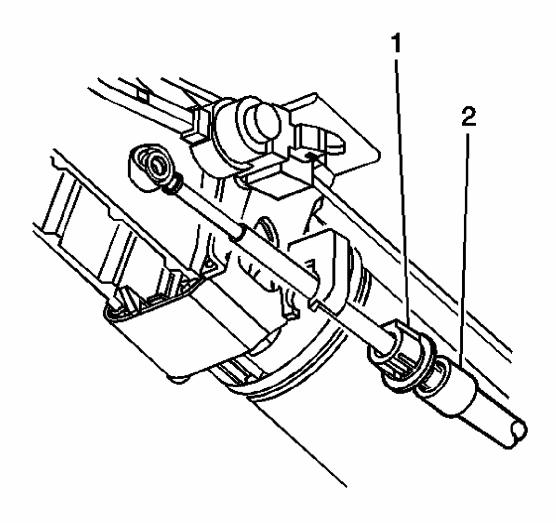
View of Shift Cable Tabs and Shift Cable Courtesy of GENERAL MOTORS CORP.
